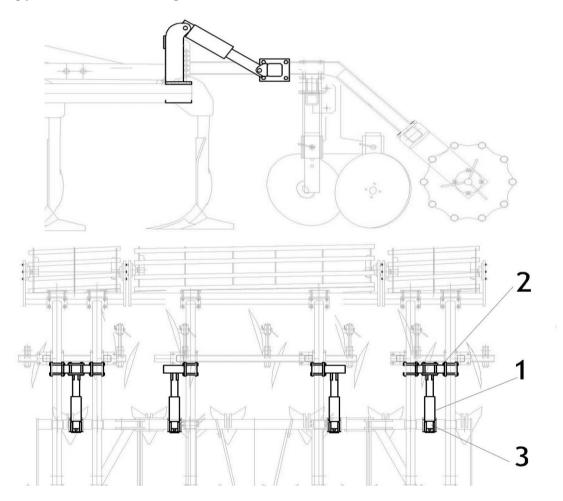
Hydraulic adjustment of the roller: 1- cylinder, 2- beam with arm bracket, 3- cylinder bracket.
